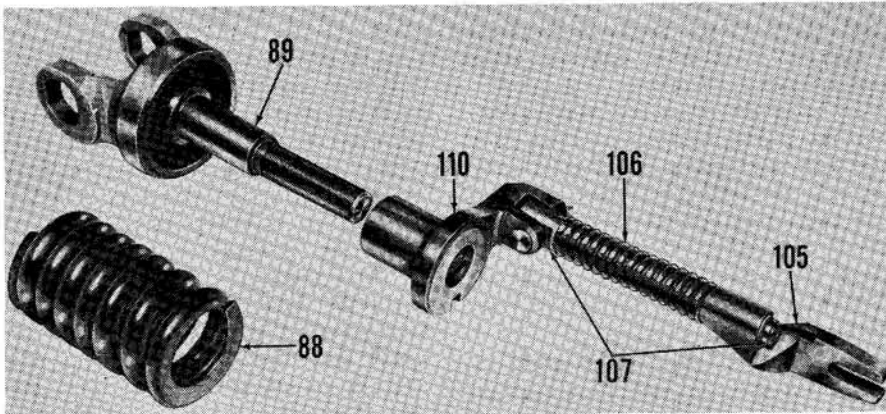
Exploded view of model "FSM" main control spring and linkage. Refer to Fig. 200 for cross-sectional view of model "New FSM" main control spring assembly. Refer to Fig. 210 for legend.
